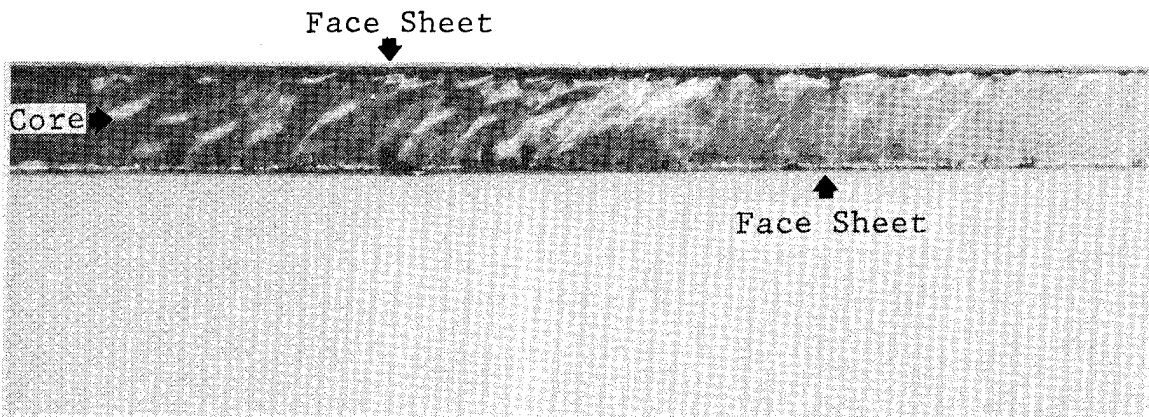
Edge View of Adhesively Bonded Aluminum Honeycomb Panel Specimen.
